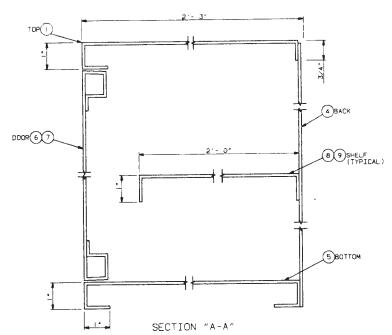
Emergency Gear Stowage Locker—Types 2, 3, and 4 (Section "A-A")
